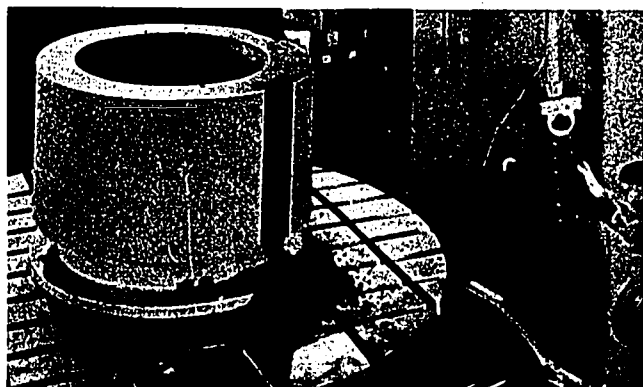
A vertical slotter is a special kind of planing and shaping machine. This machine is shaping a part for a ship.
